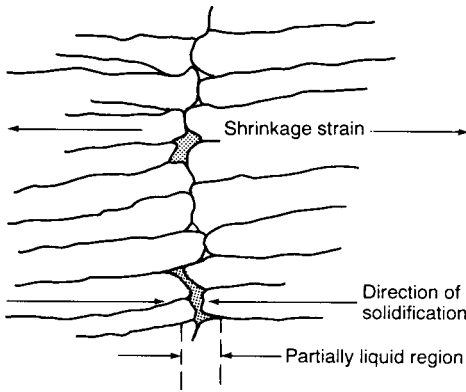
Schematic indicating projected mechanism of solidification cracking in an electroslag weldment. Source: Ref 54, 55
